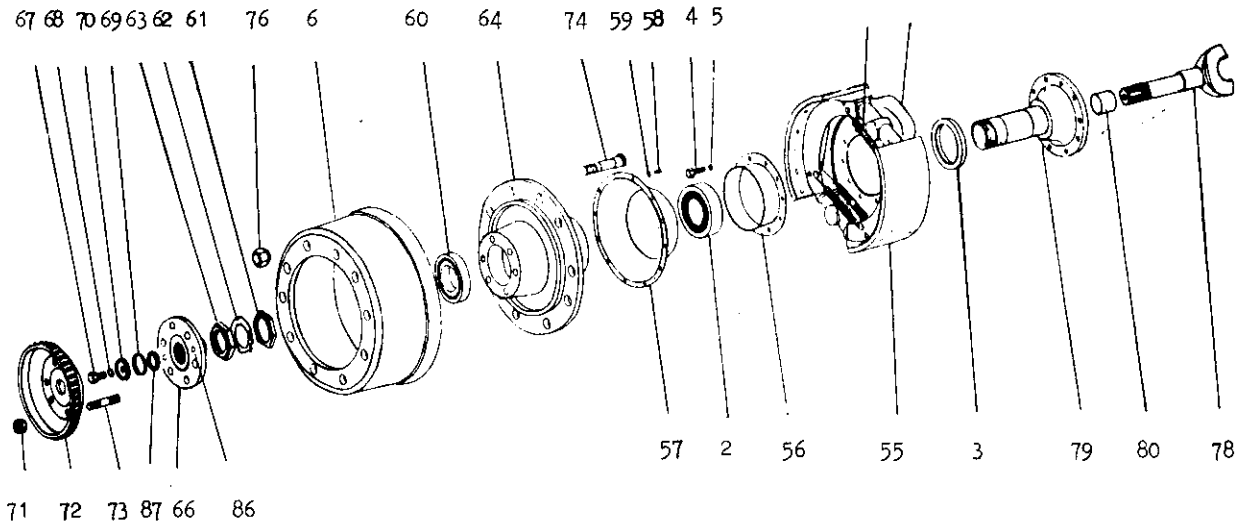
FRONT RIGHT HUB ASSEMBLY (EXPLODED)
